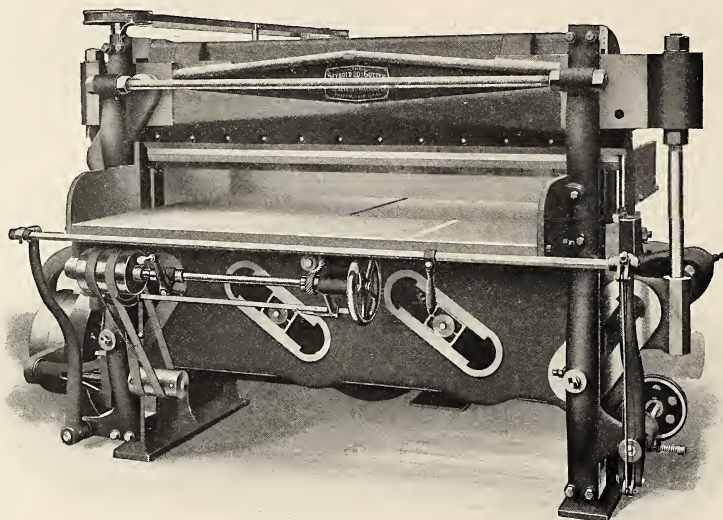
, 64, 74 and 84-inch machines equipped with power gauge attachment.
